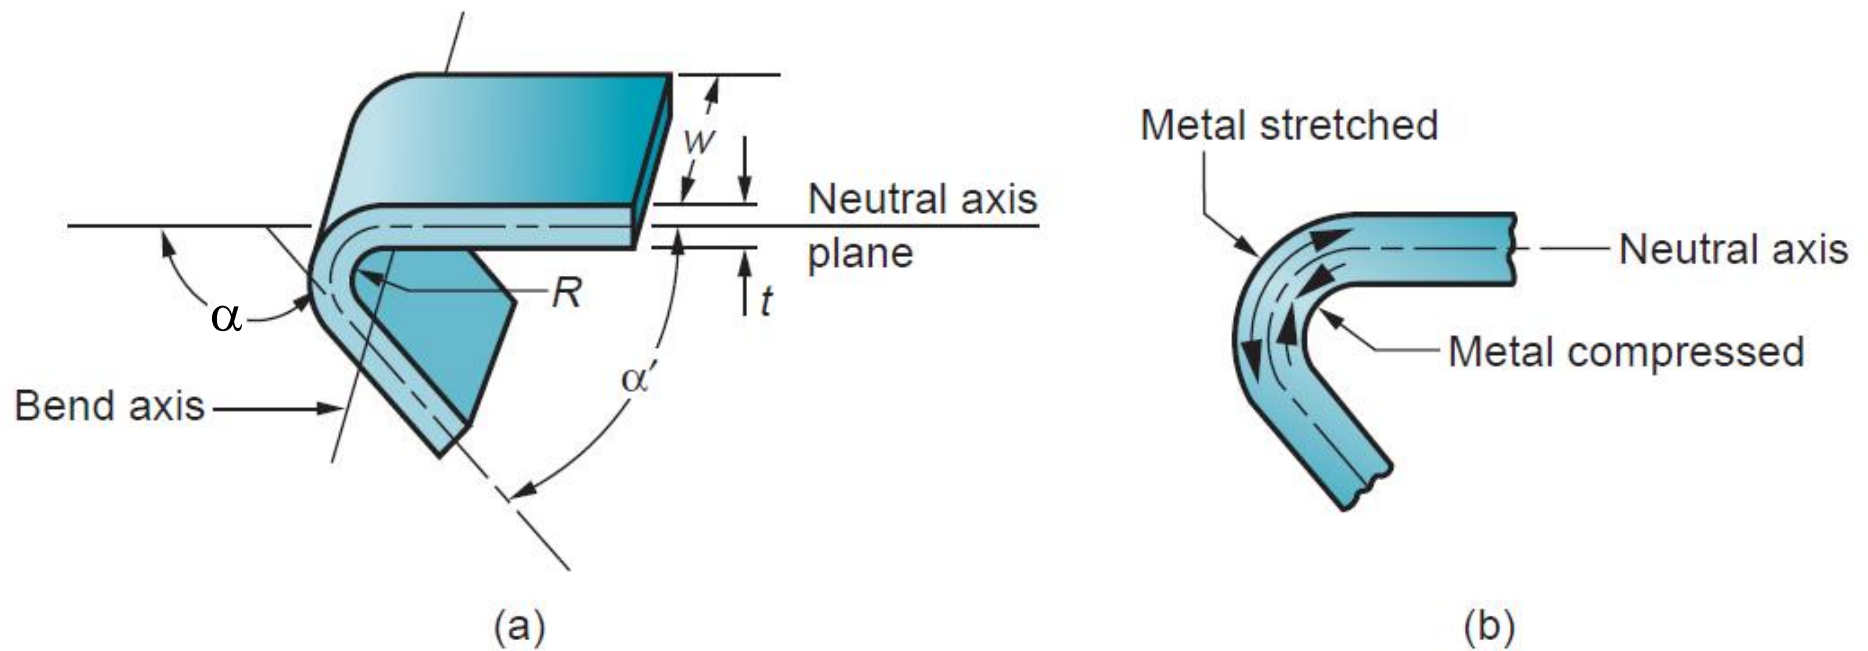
(a) Bending of sheet metal; (b) both compression and tensile elongation of the metal occur in bending.
